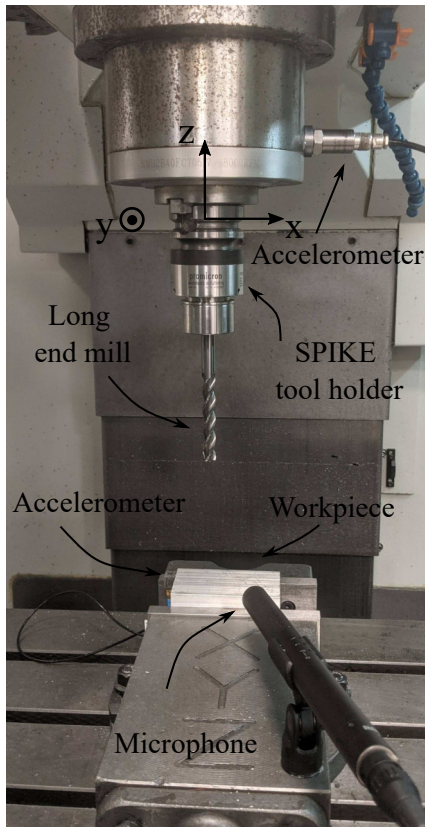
Experimental setup consisting of a long end mill, an Aluminium workpiece, a sensory tool holder, two accelerometers, and a microphone.
